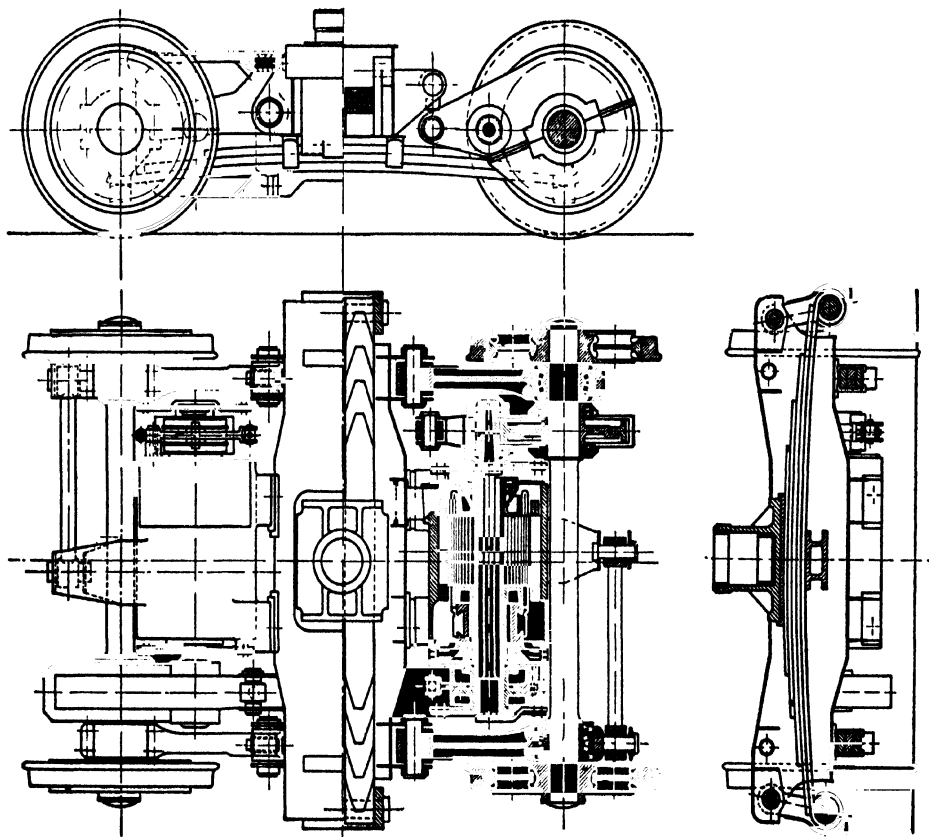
ELEVATION AND SECTIONAL PLAN VIEWS OF BOGIE WITH
